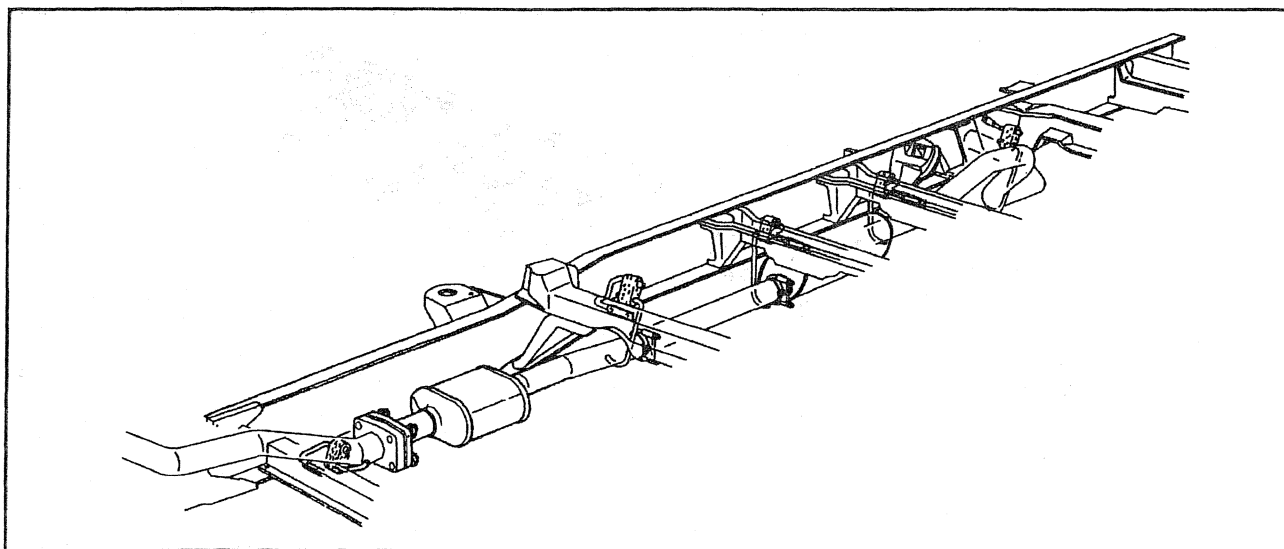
Exhaust System - C 3 Cab Chassis (Models 314 & 318 w/L65 & 15,000 GVW)
